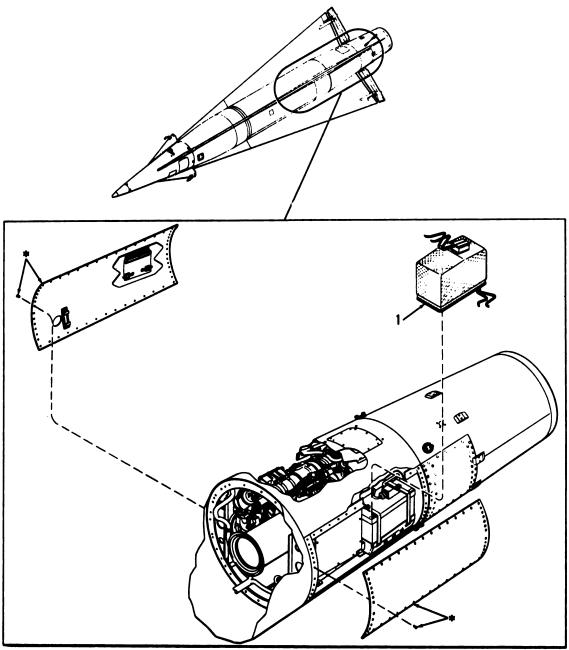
IGNITER, ROCKET MOTOR, M72 /10602061/ /SEE FIGURE 17 FOR NEXT HIGHER ASSEMBLY/
